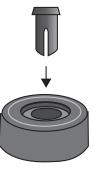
Inserting the Rivet Housing into the Bumper Foot
